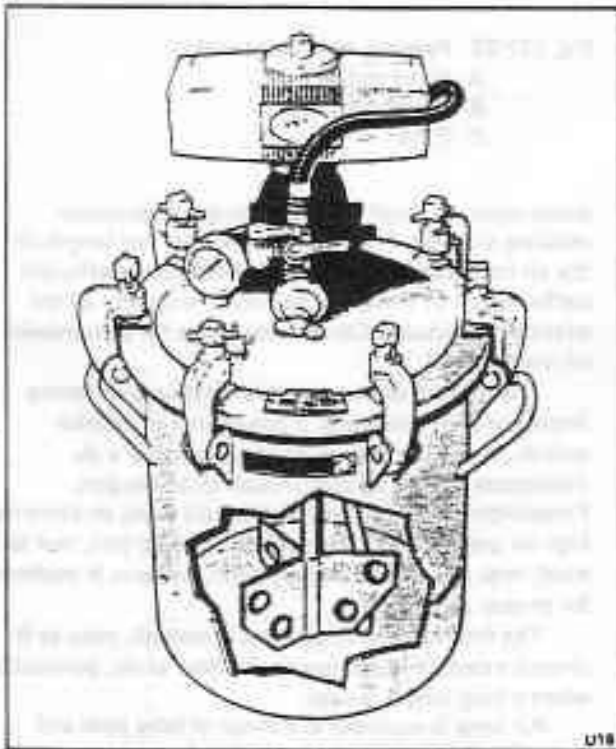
Pressure feed paint tank with an air motor driven agitator
